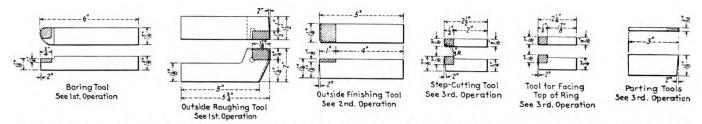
Stellite-tipped tools used in valve-ring production at West Albany—From left to right these tools are the boring tool, outside roughing tool, outside finishing tool, step-cutting or recessing tool, facing tool, and all-stellite parting tool. The operations refer to Fig. 4
